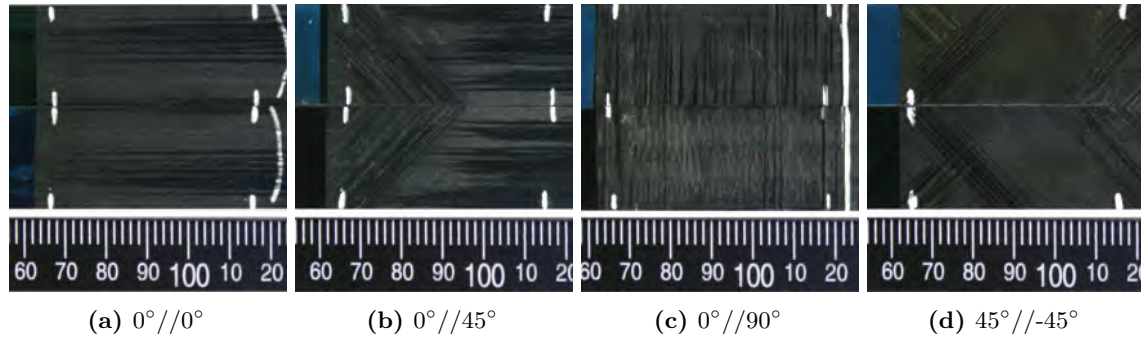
Fracture surfaces of DCB specimens [235]
